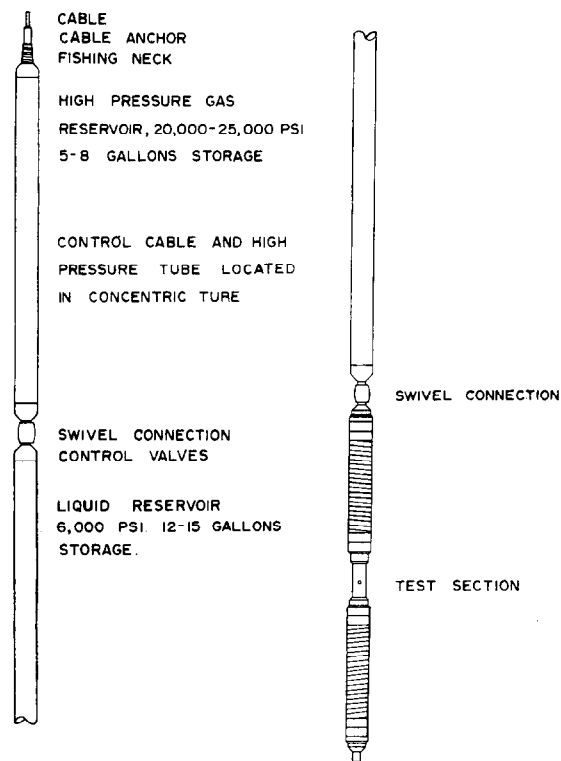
Tool No. 4 - High pressure gas reservoir.
